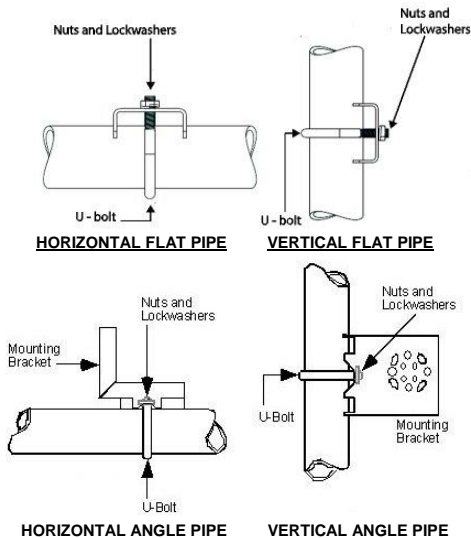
Flat and Angle Mounting Brackets secured to Horizontal or Vertical Pipe
